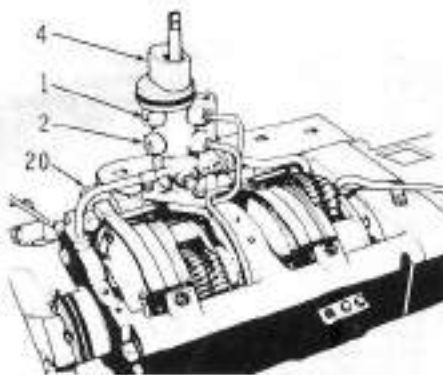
A—View of control valve (4) positioned showing routing of lines. Tubes from ports (1 & 2) go to sequence valves shown at (1 & 2—Fig. 120).
